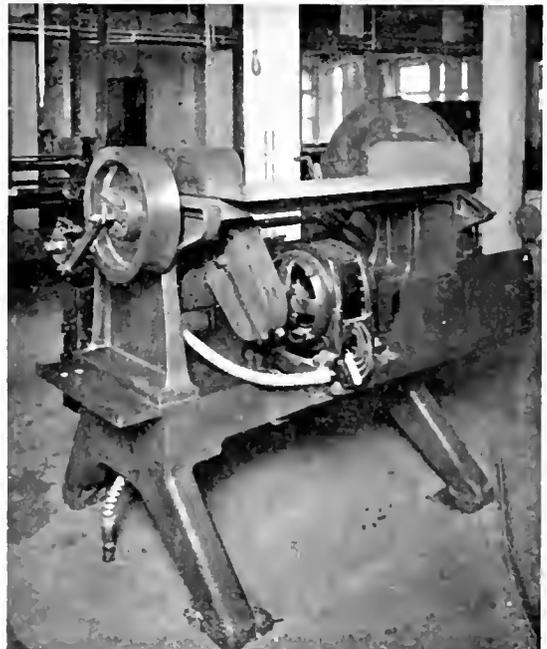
Slicing Machine Individually Driven by Small Induction Motor
